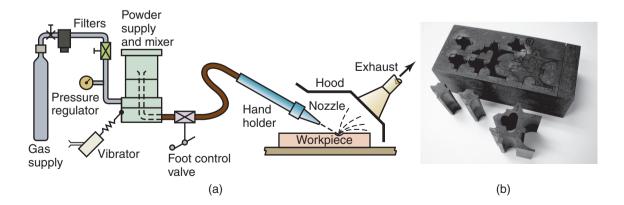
(a) Schematic illustration of the abrasive-jet machining process. (b) Examples of parts made by abrasive-jet machining, produced in 50-mm thick 304 stainless steel. *Source:* Courtesy of OMAX Corporation.
